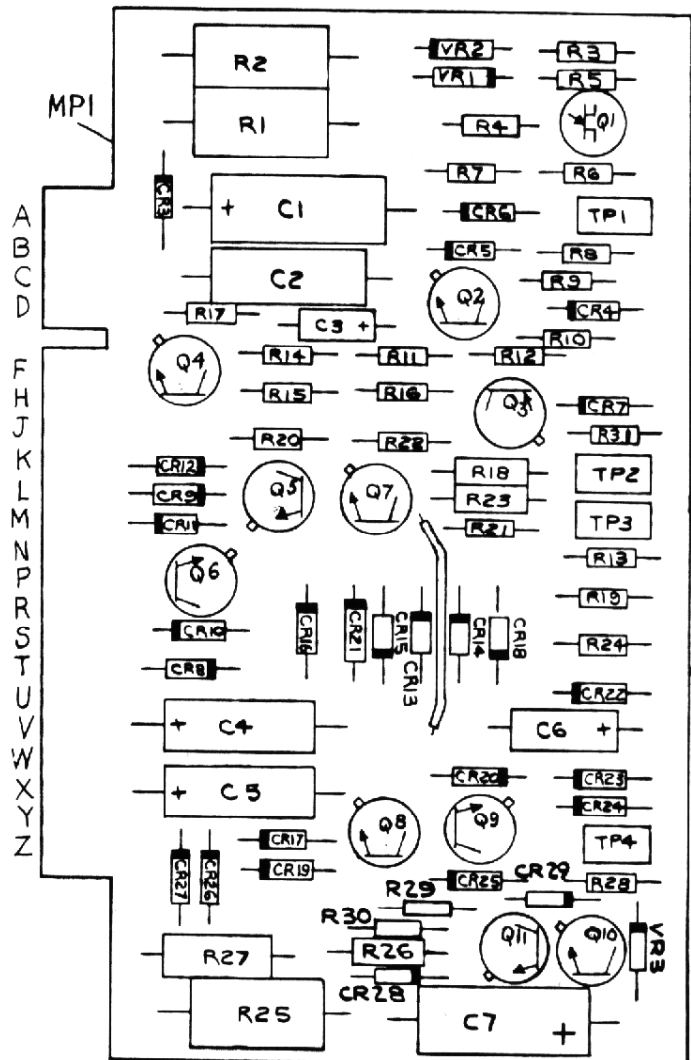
Printed Circuit Board 2A1A5, Component and Test Point Locations
